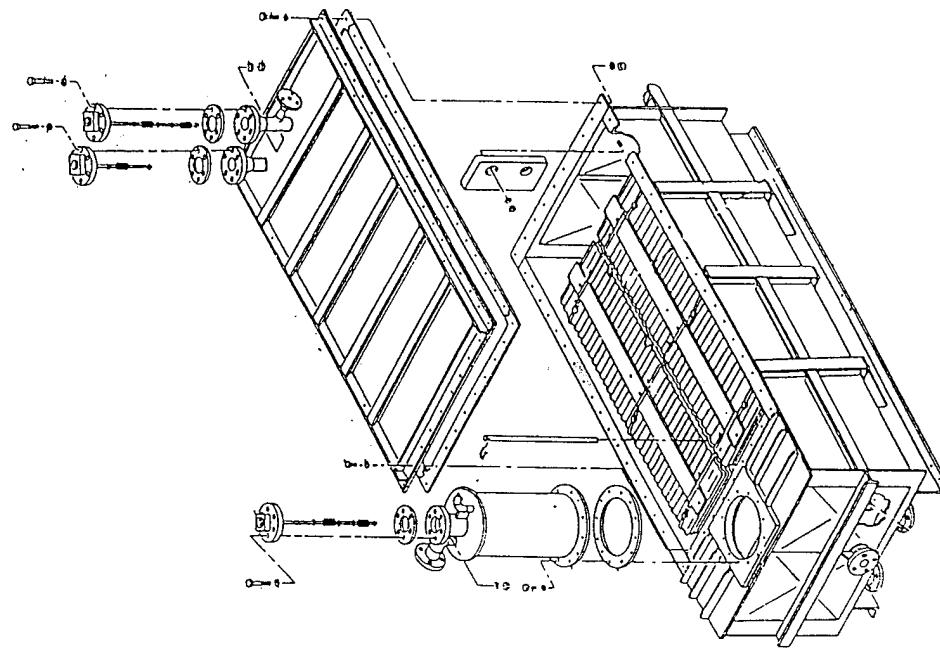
FRAM OIL WATER SEPARATOR ASSEMBLY
